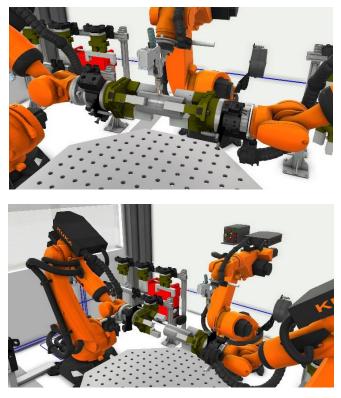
UP: Robotic holding during welding of two to-be-welded cylindrical objects - simulation. BELOW: Robotic manipulation of welded cylindrical object - simulation.
